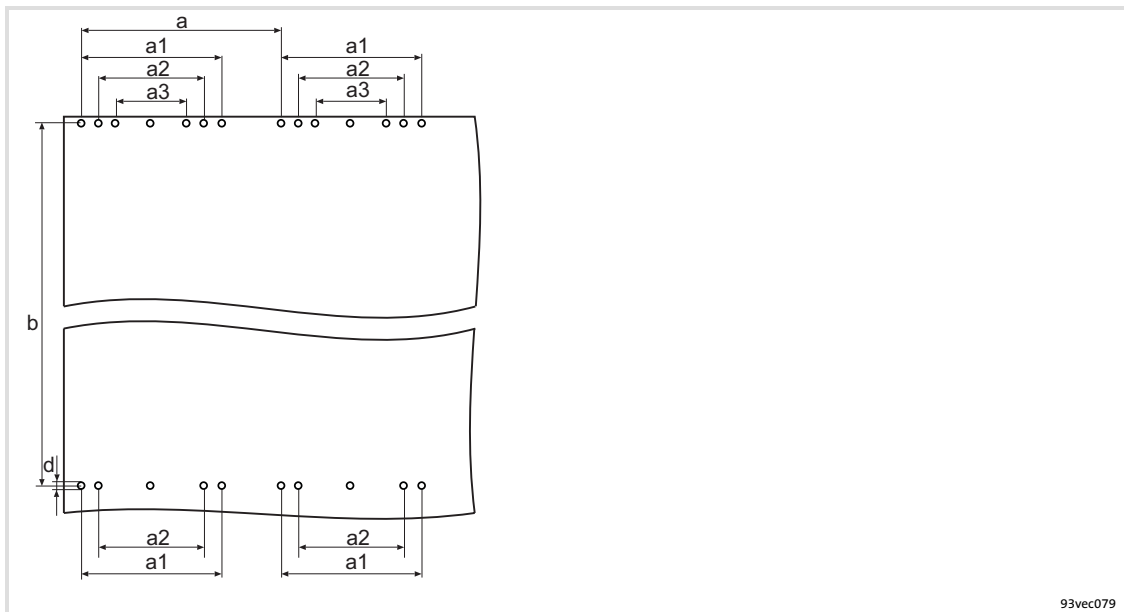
Bore holes in the mounting plate for fixing the controller
